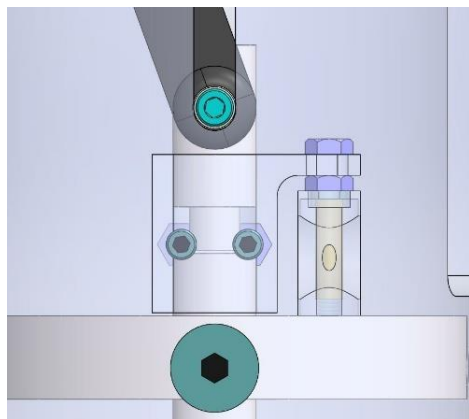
Frangibolt mechanism mounted to inner guide plate.
